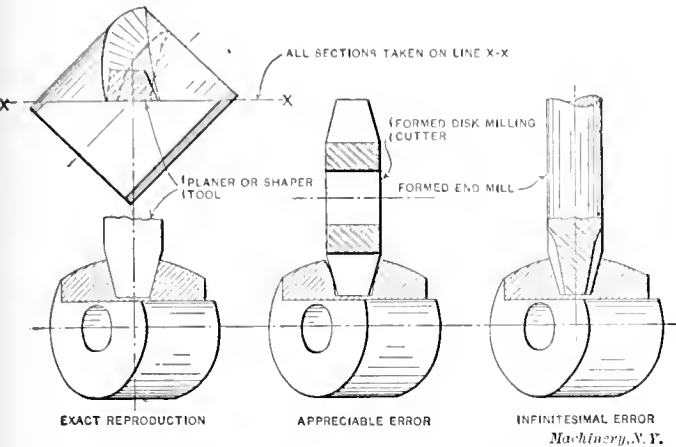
Comparison of the Accuracy of Form Reproduction Obtainable by Formed Planing Tool, Formed Disk Cutter, and Formed End Mill
